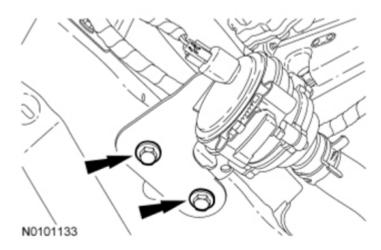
Locating MECS Pump Bolts Courtesy of FORD MOTOR CO.
